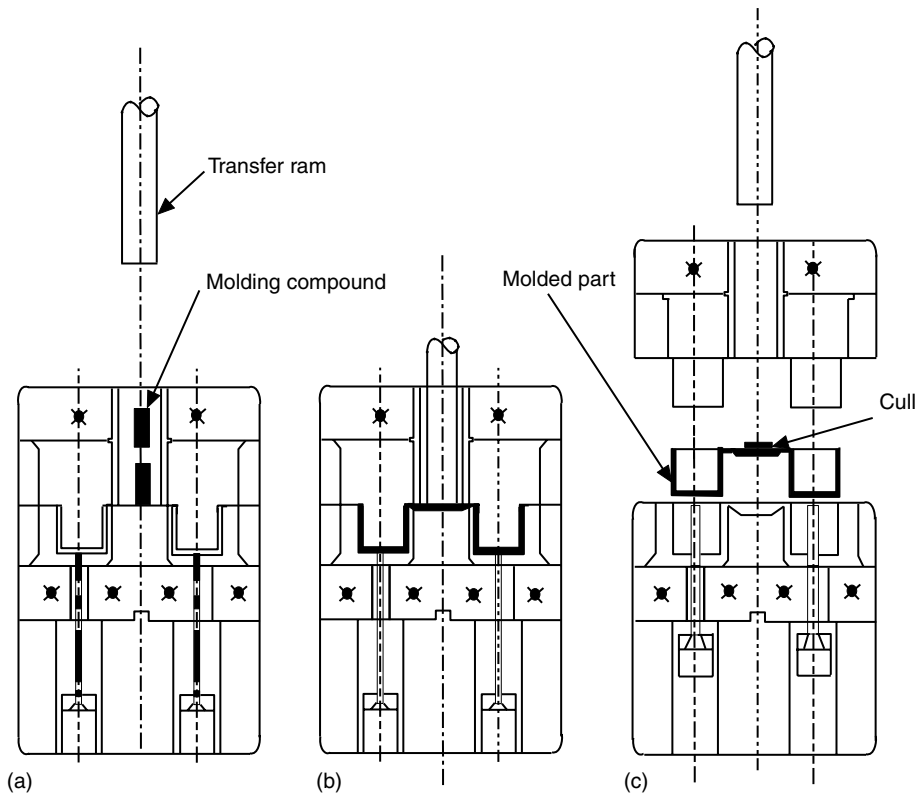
Molding cycle of a plunger-type transfer mold. (a) An auxiliary ram exerts pressure on the heat-softened material in the pot and (b) forces it into the mold. (c) When the mold is opened, the cull and sprue remain with the molded piece. (After Frados, J. ed. 1976. *Plastics Engineering Handbook*, 4th Ed., Van Nostrand Reinhold, New York.)
